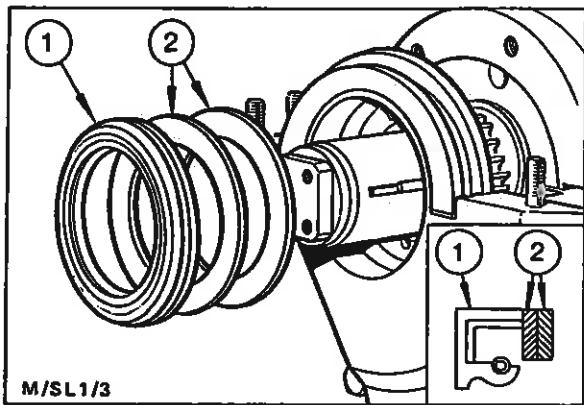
Assembling Crankshaft Pulley Oil Seal into Timing Gear Housing Cover
